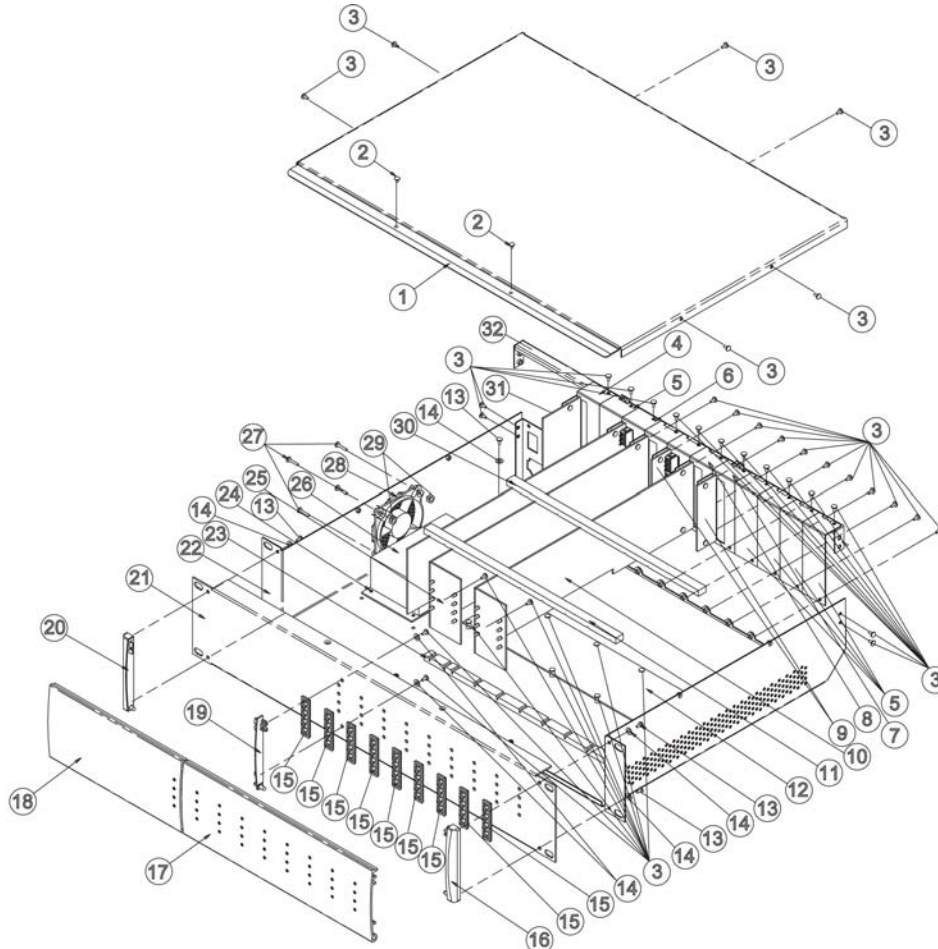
ControlSpace ESP-88C/ESP-00 Chassis Exploded View
